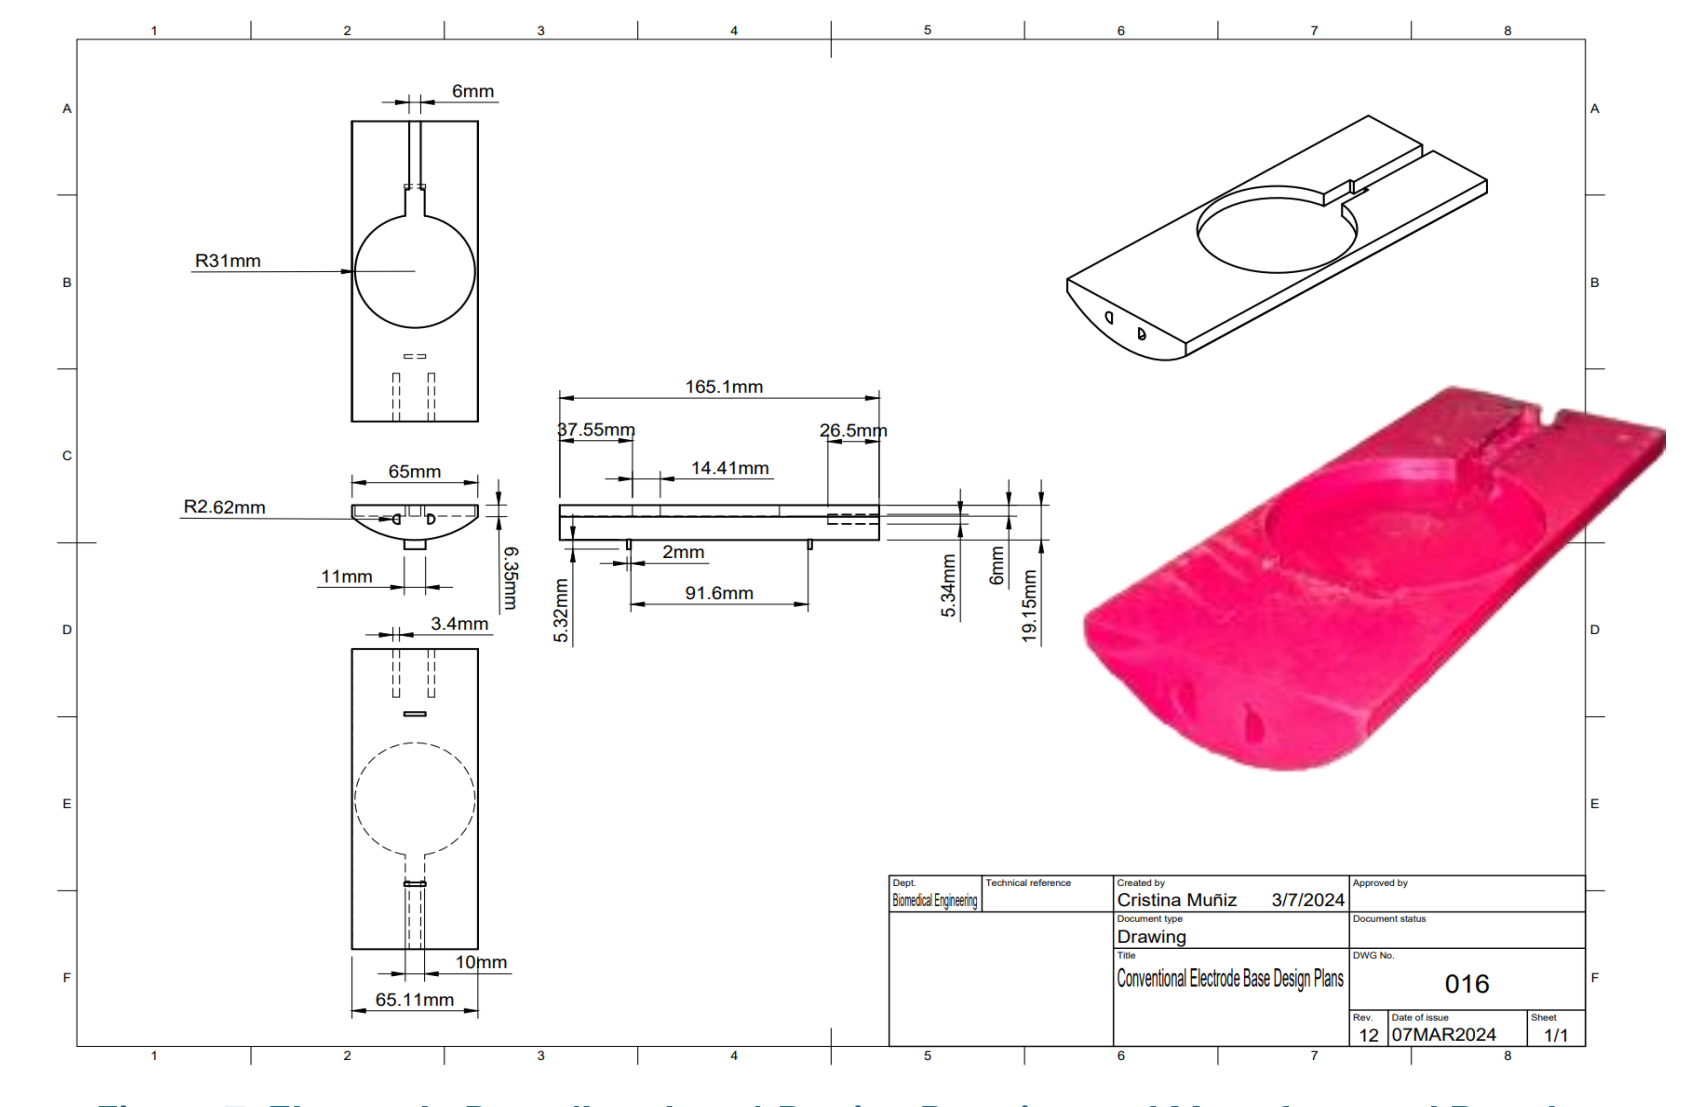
Electrode Base (Insulator) Design Drawing and Manufactured Result
